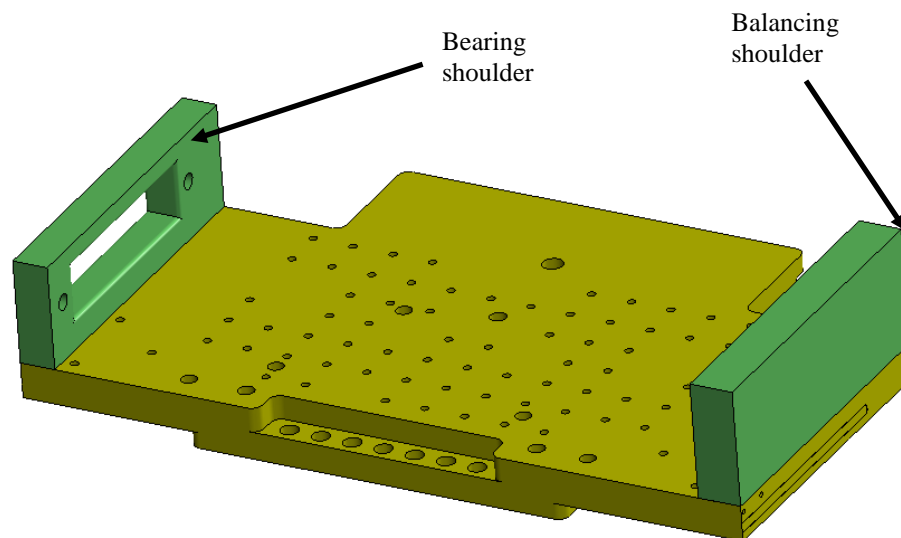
Illustration of the bearing and balancing shoulders on the carriage model.
